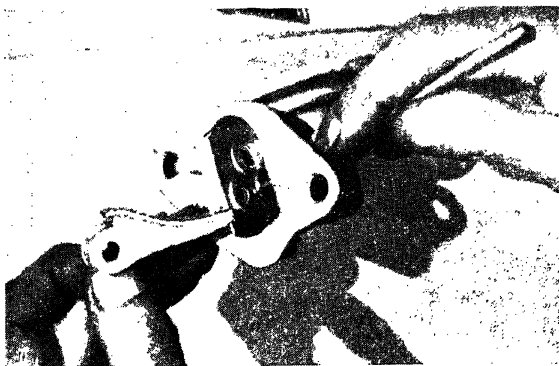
To ASSEMBLE ROCKER ARM AND LINK ASSEMBLY (2)
